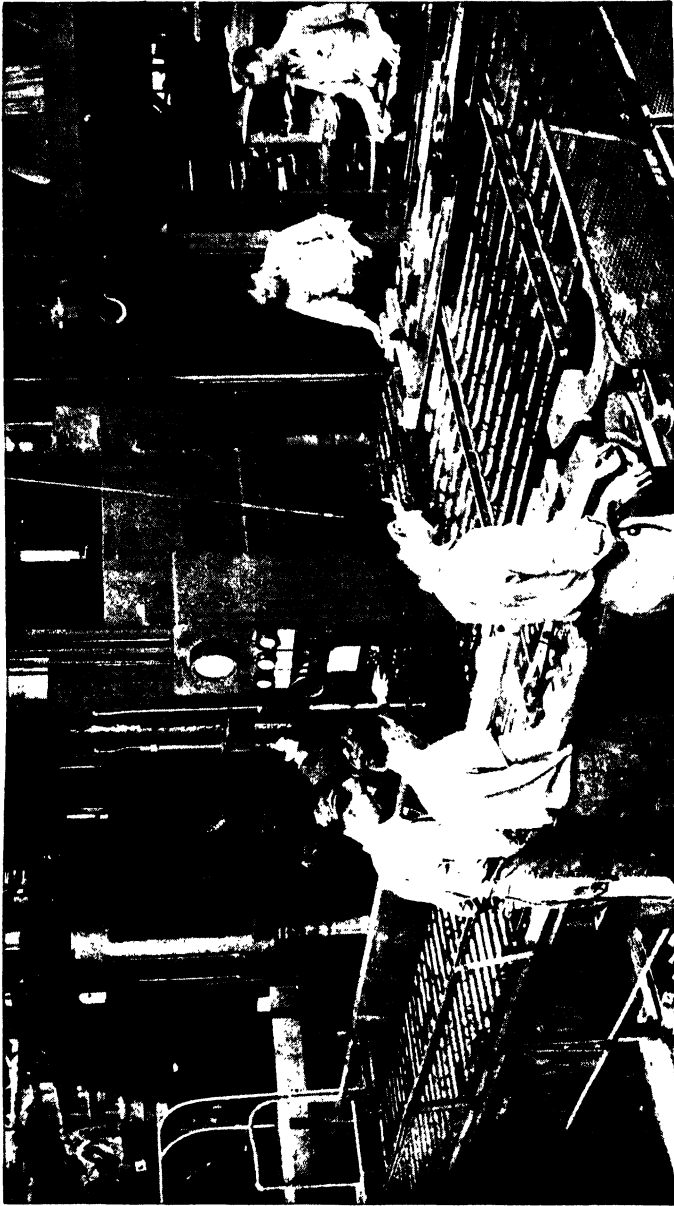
PLATE XXIII.—Forming many small parts in one press stroke. A huge Watson-Stillman hydropress fabricates small parts from Duralumin blanks in the Lockheed Aircraft plant at Burbank, Calif. The parts made are used in both the P-38 lightning fighters and the Hudson medium-sized bombers. The feature here is the "merry-go-round" table equipped with roller conveyers, on which forming dies, with blanks placed on them, are transported under the rubber platen in the press for forming, after which the finished parts are removed by the crew. (Cleared by the War Department for Lockheed Aircraft Corporation.)
